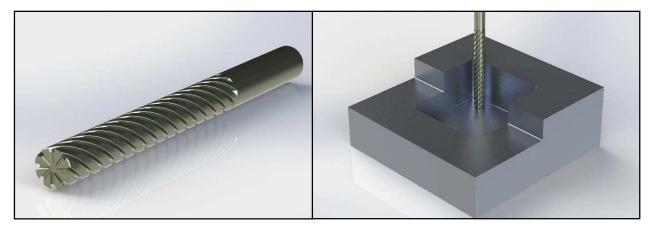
End Mill and its use to cut a pocket in an aluminum block. Note that the end mill produces a flat bottomed pocket with straight sides and filleted corners.
